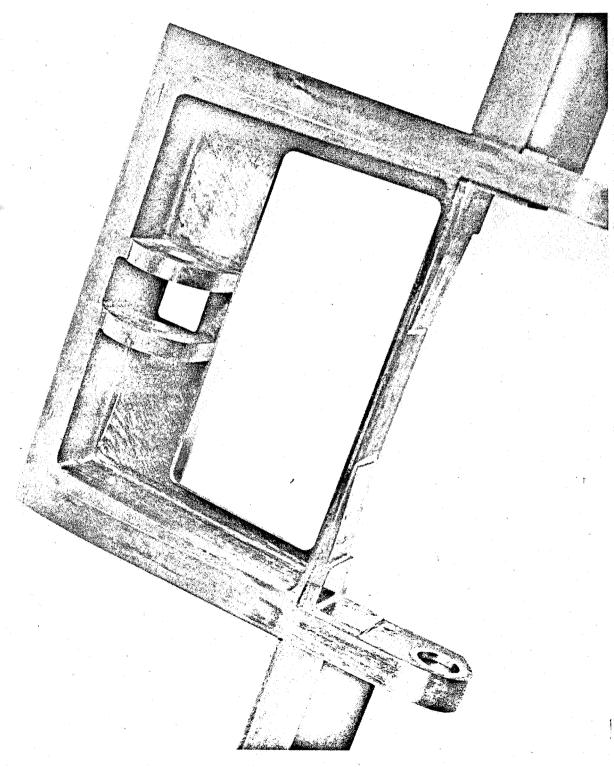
CENTER HINGE FITTING OF INTEGRAL HINGE/SPAR ASSEMBLY FOR 65-76327-XY PROTOTYPE
